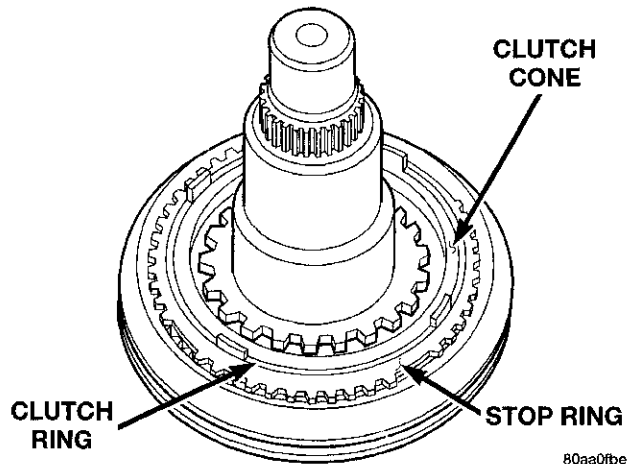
Second Gear Clutch Cone, Clutch Ring, And Stop Ring Installation
